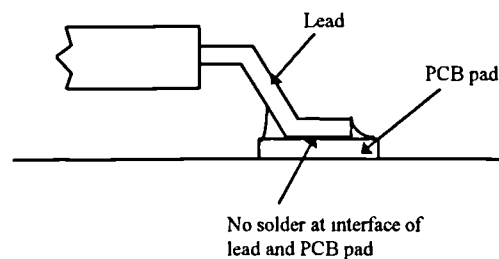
A typical hand-soldered joint with no solder at lead and PCB pad interface
